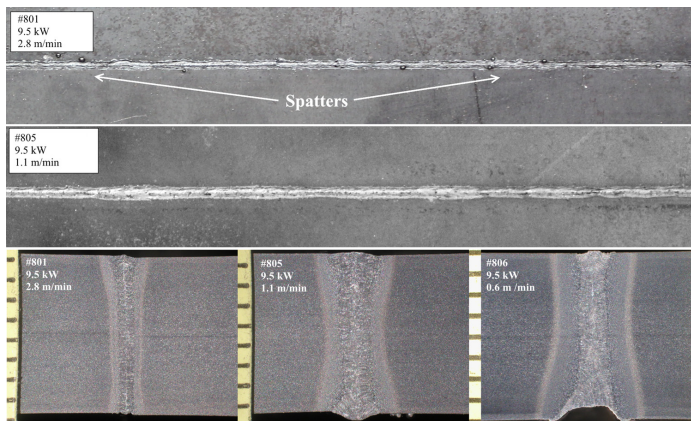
Visual comparison of top side (half-length) and cross section of the welds welded with highest and lowest welding speeds
